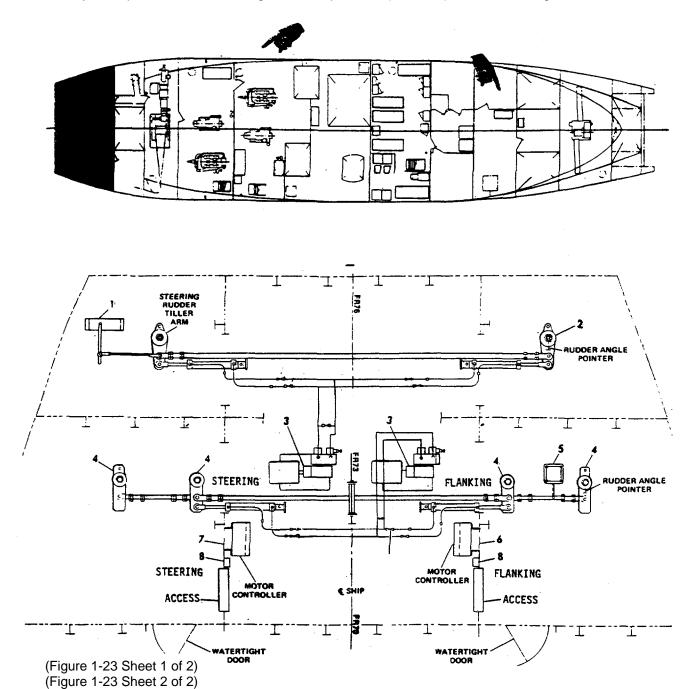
Steering Gear Compartment (Sheet 1 of 2).
